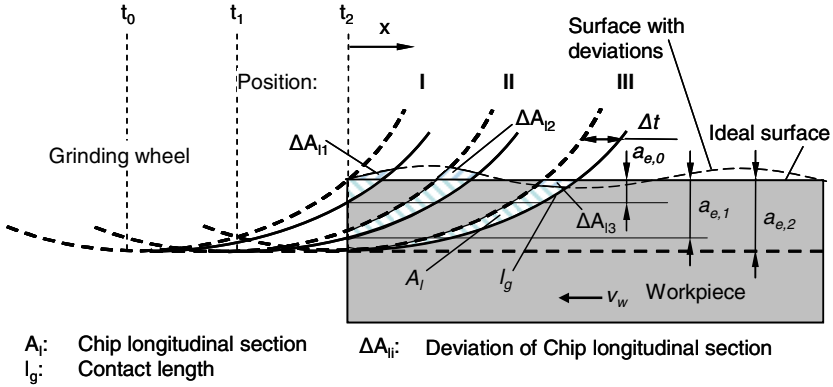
Chip longitudinal section during run-in of the grinding wheel
